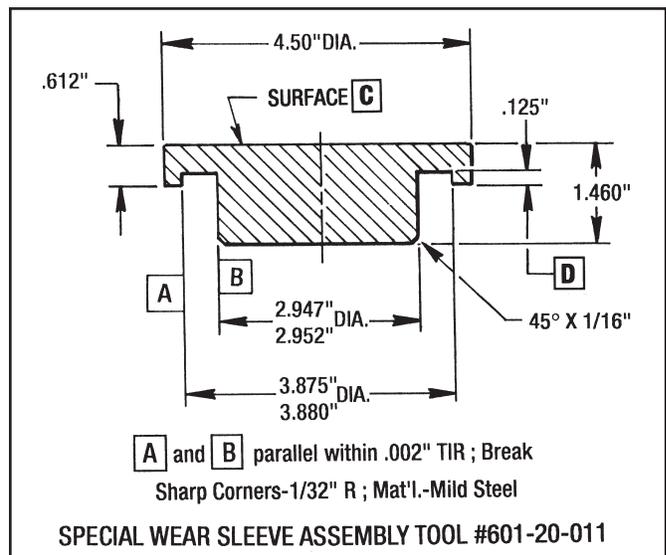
Wear Sleeve Assembly Tool for #20 Posidyne
